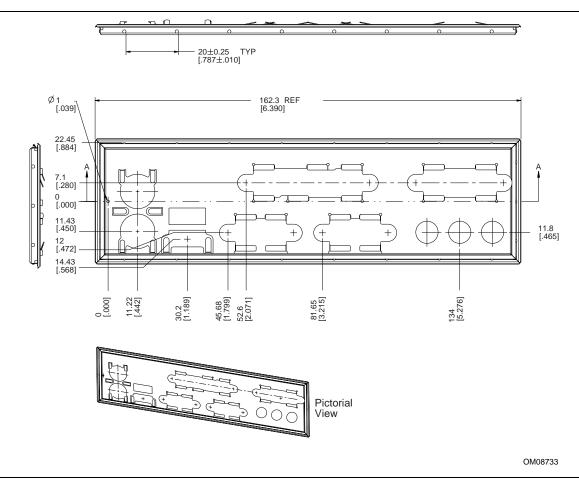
Back Panel I/O Shield Dimensions (microATX Chassis - Independent)
